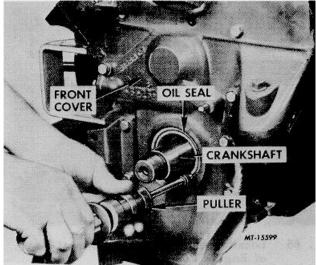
Removing Front Cover Oil Seal Using SE-2091 Seal Puller
